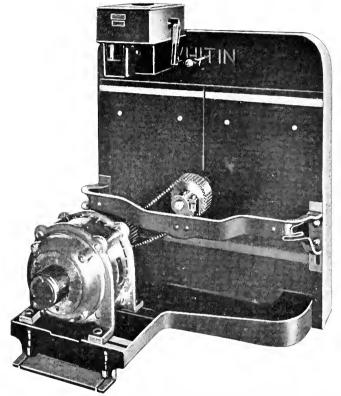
MOUNTING OF MOTOR AND CHAIN DRIVE ON HEAD END OF SPINNING FRAME
